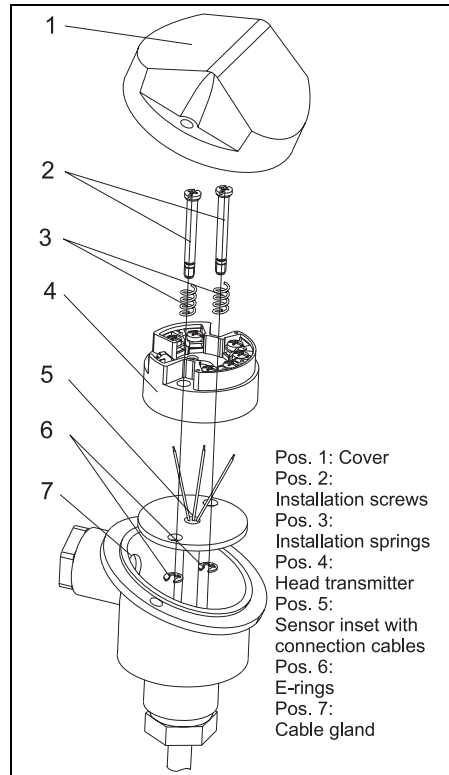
Installation of head transmitter into a Form B sensor connection head.
